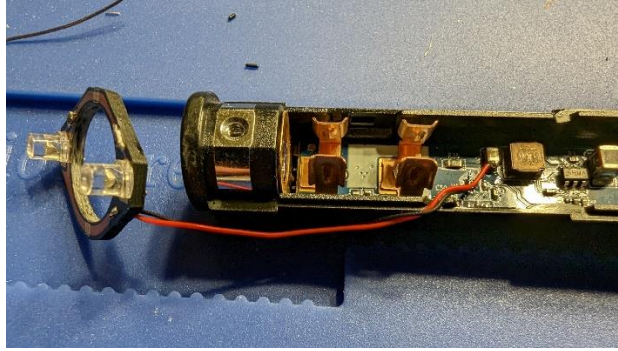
Slack with wires so you can still disassemble and assemble with LED ring attached.
